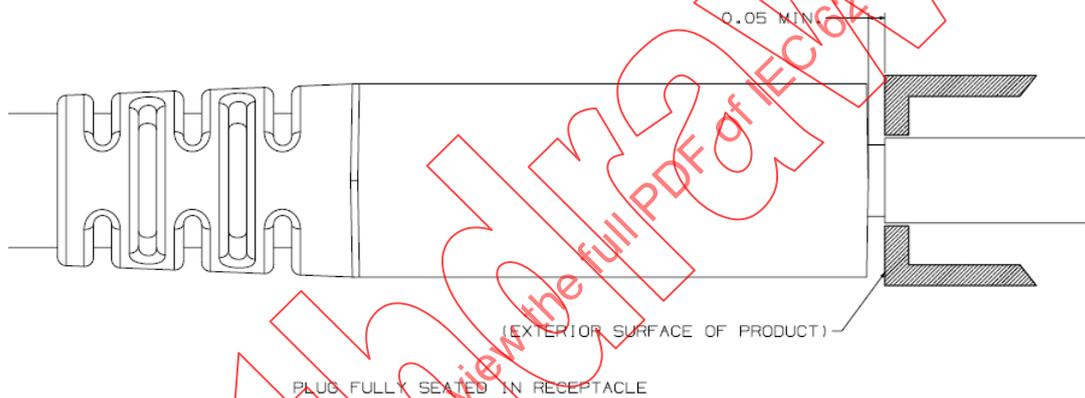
Recommended Minimum Plug Overmold Clearance
